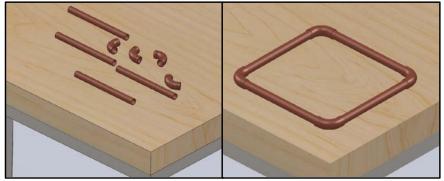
Assemble all the pieces- Make sure they are all in the same plane and snug.
